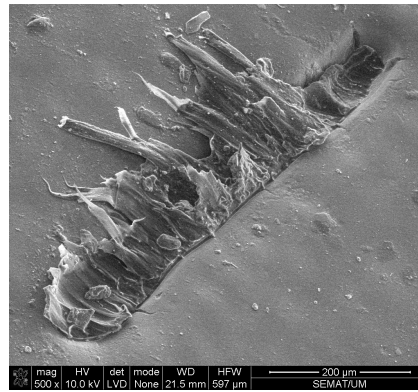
Detail (2) view of filled cavity wall on the low-relief SE logo
